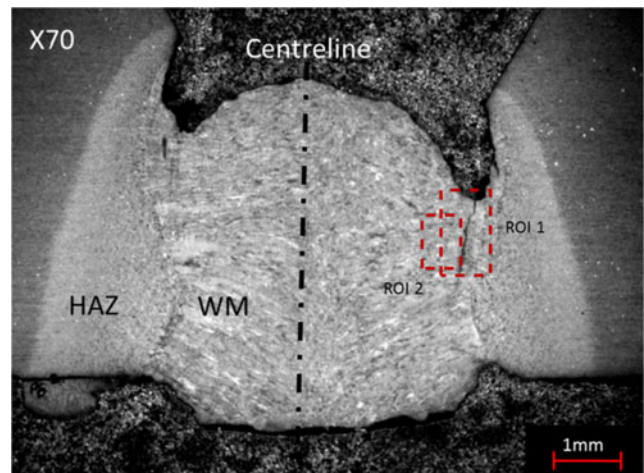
Overview of weld bead (2 % nital etch) highlighting macrohydrogen (ROI 1) cracks which initiate from macroscopic defects such as undercut in the weld toe and microscopic hydrogen cracks (ROI 2) which initiate from microvoids or non-metallic inclusions
